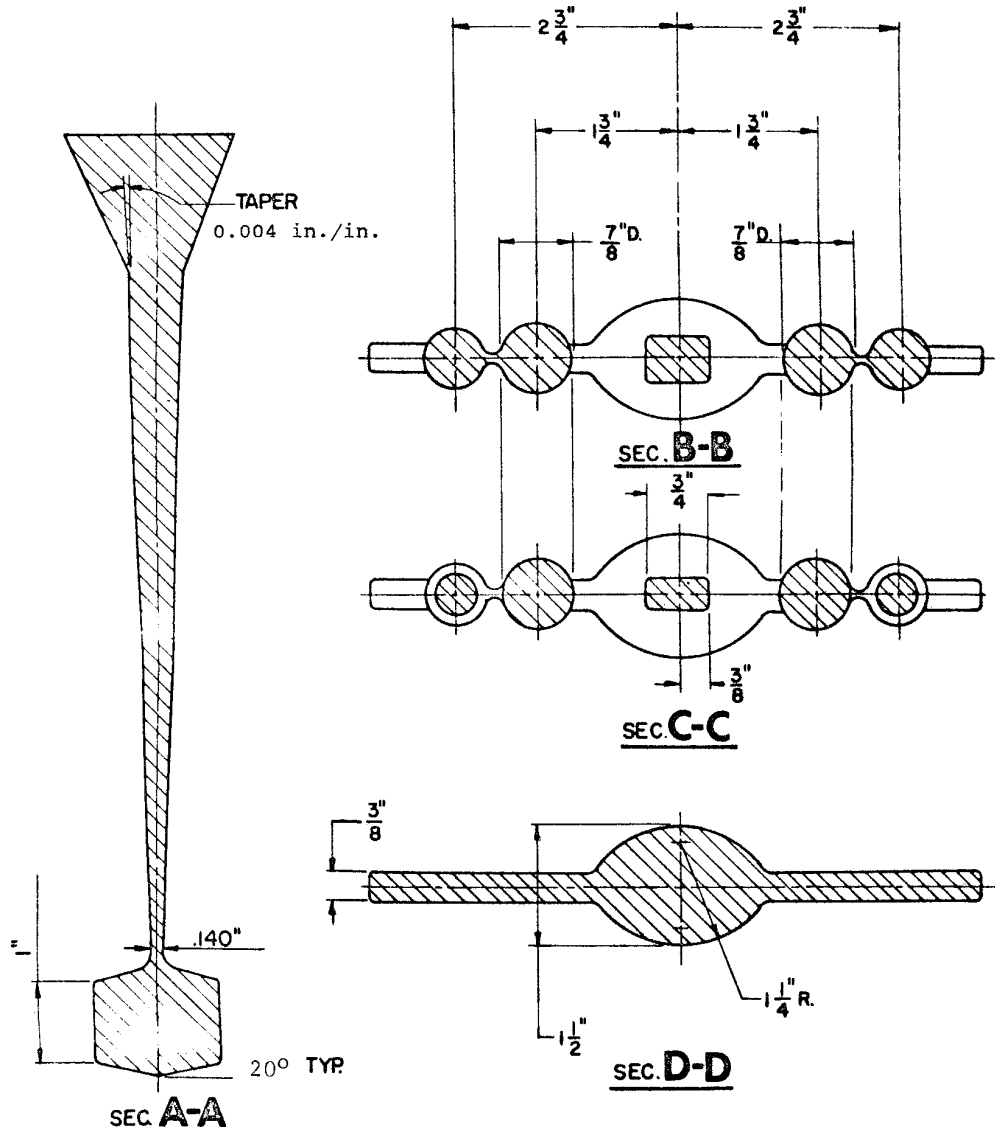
Tension Test Specimen Casting (Cross Section) – (Inch Pounds)
